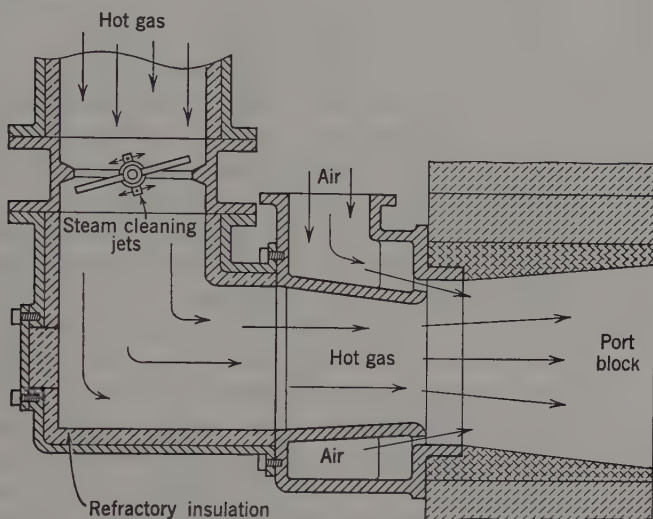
Burner for raw producer gas. Courtesy of Bloom Engineering Co.
